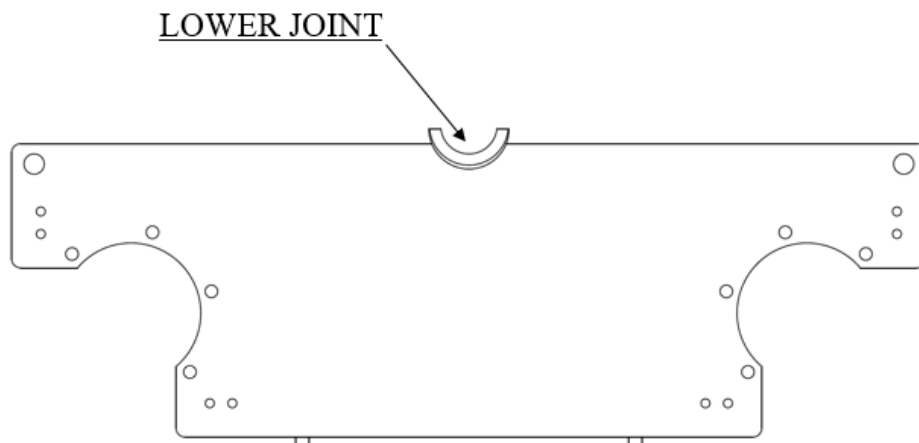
Bogie frame side view and lower joint geometry (Konecranes 2018c).
